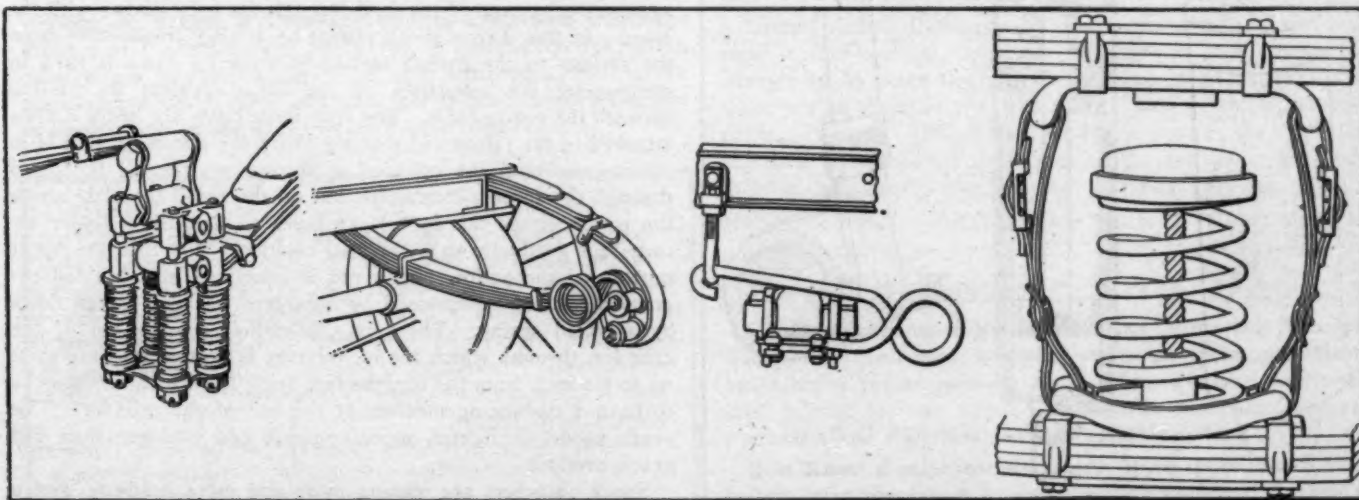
Velvet auxiliary spring. Fig. 6—Acme torsion spring.
